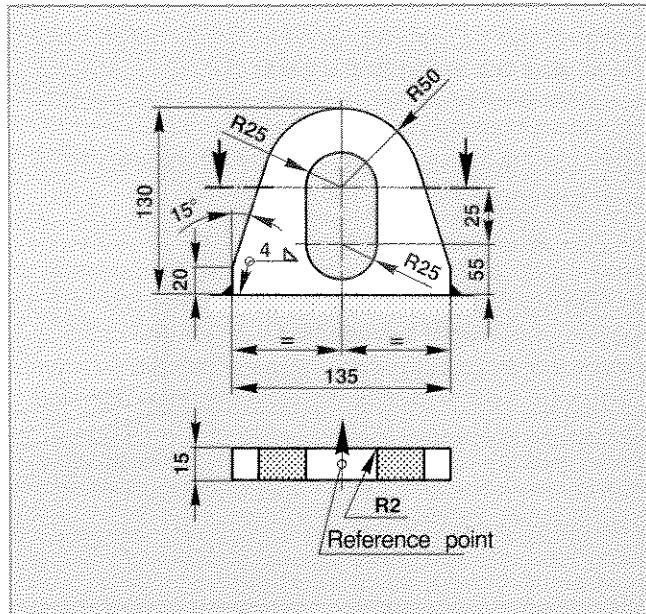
Lifting lug Type B for attaching container hooks to horizontal surfaces
